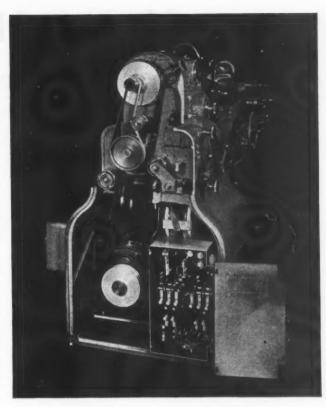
Monarch Tool-room Lathe Equipped with Voltage-control Electric Drive and Electronic Control
